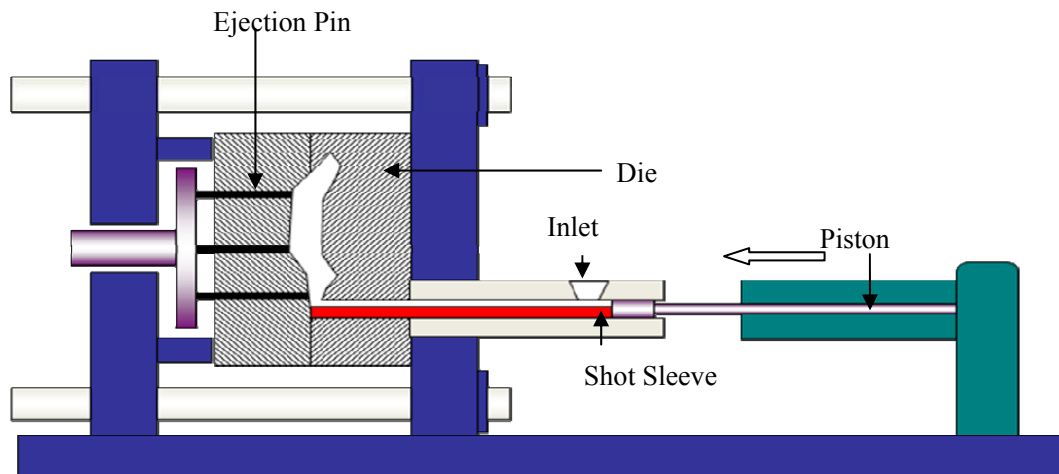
The structural sketch of the 'high pressure die-casting' (HPDC) machine.
